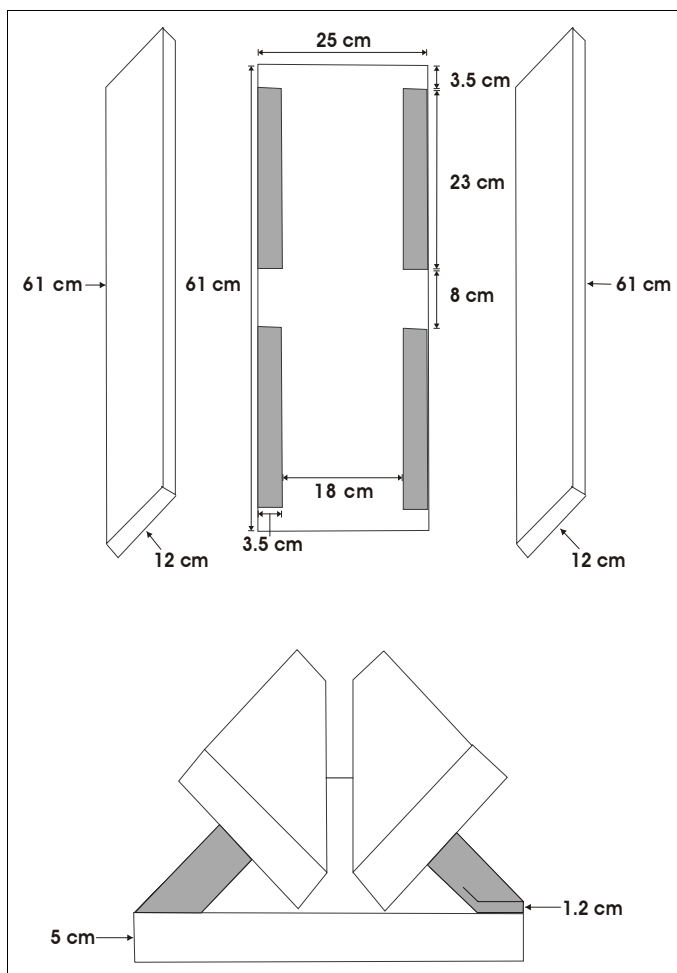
Recommended dimensions for V-shaped wooden cover board.
